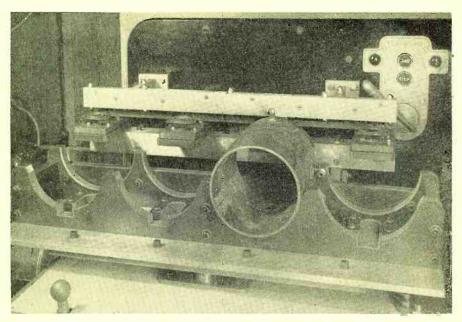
Spiral-type work-coils for brazing suction fittings into compressor housings.
